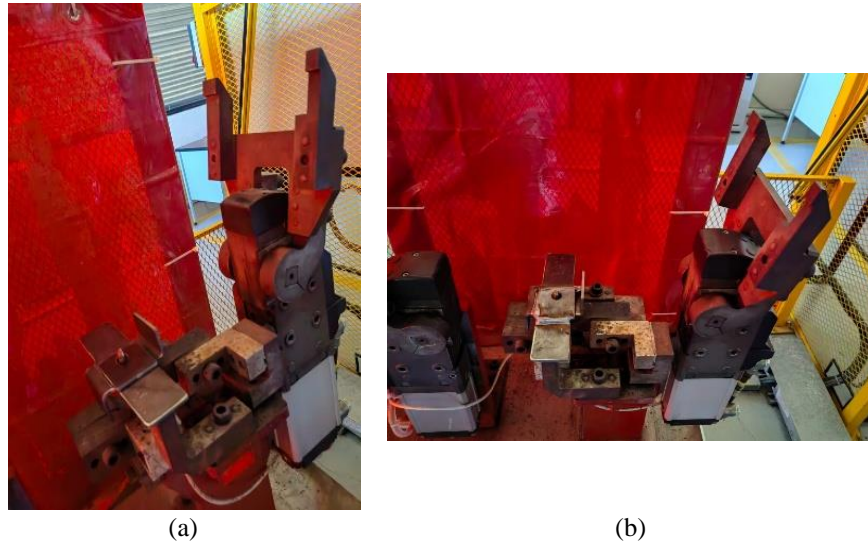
Metallic parts to be welded. (a) In clamps and (b) With welding seams.
